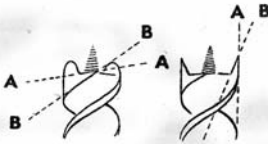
CUTTER ANGLES FIG. 4. NICKER ANGLES
